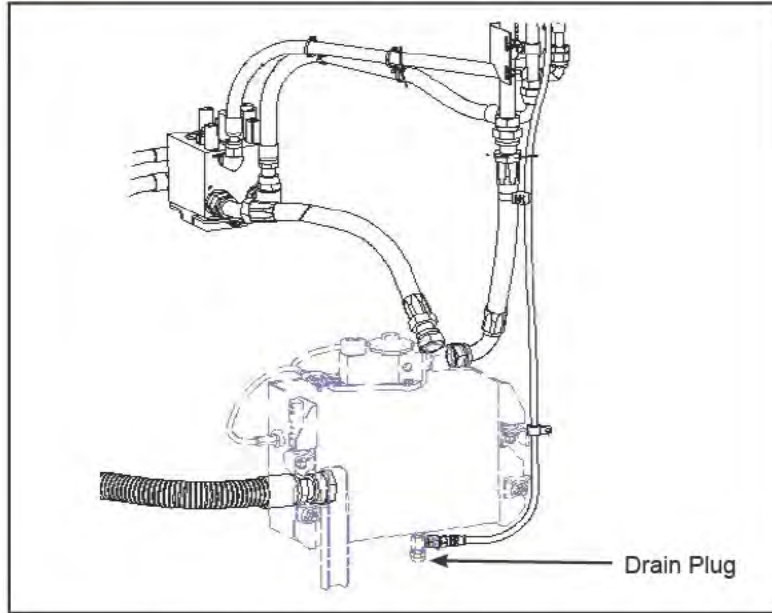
Drain Plug Location, Underside of Hydraulic Tank
